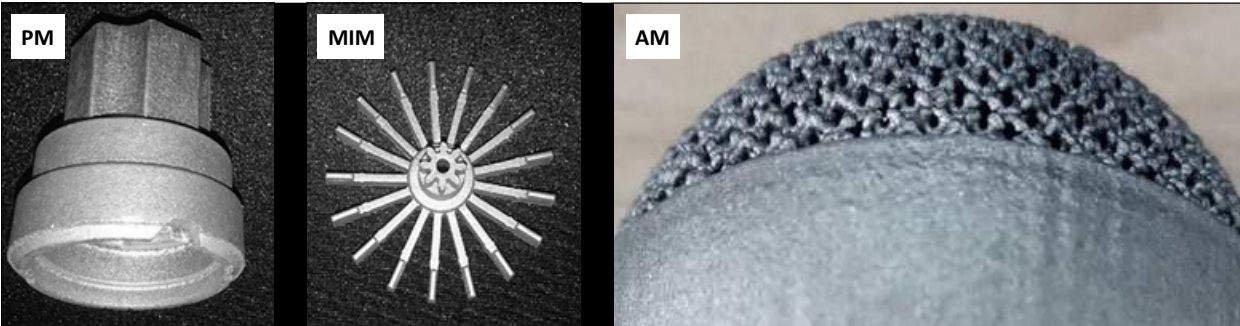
Sample parts using aluminium manufactured by PM, MIM and AM
